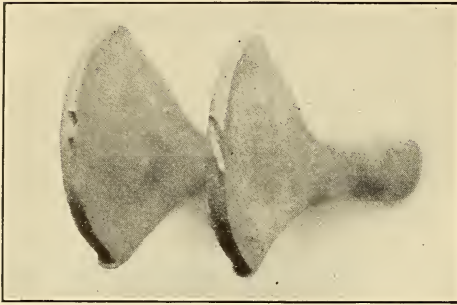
Specimen after “head-flattening” test showing failure at edges
